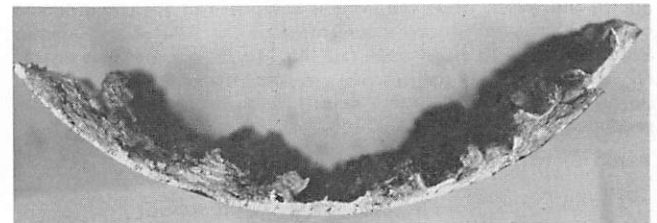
Cross section of the pipe wall showing the layers of corroded aluminium alloy separating from the interior surface.
